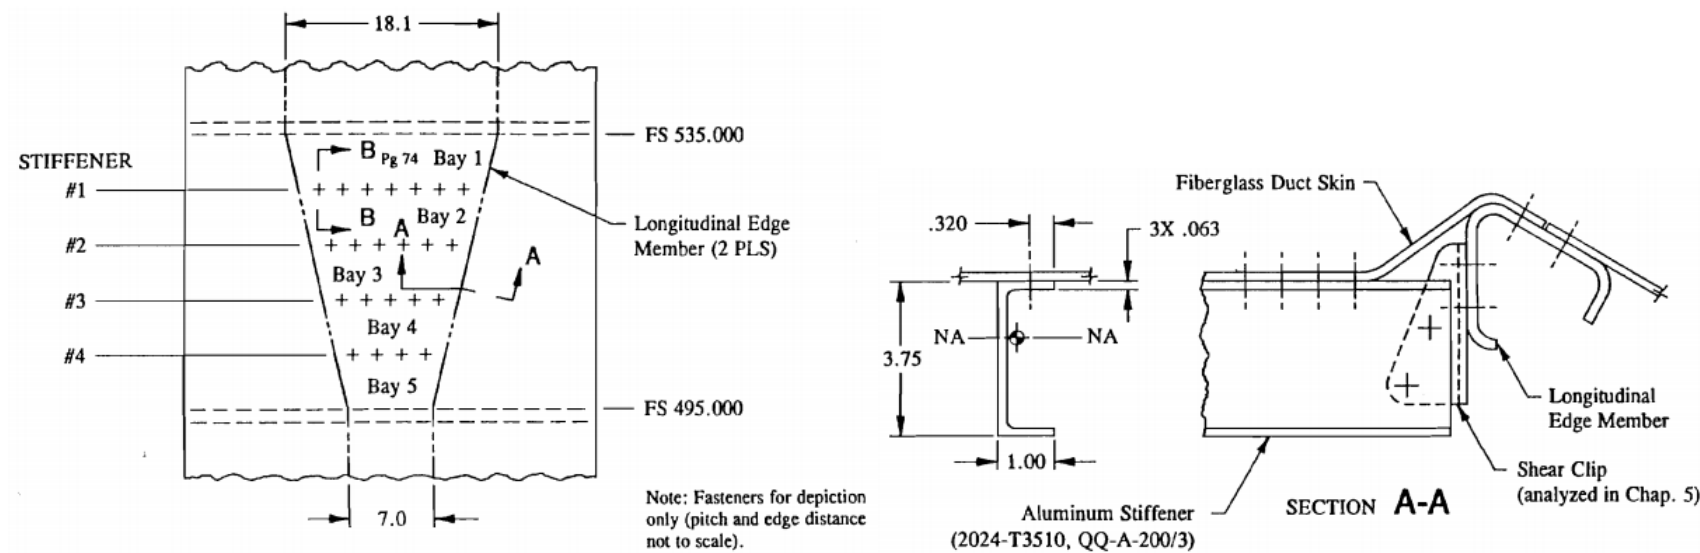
Engine air-inlet duct shown with typical stiffeners equally spaced.
